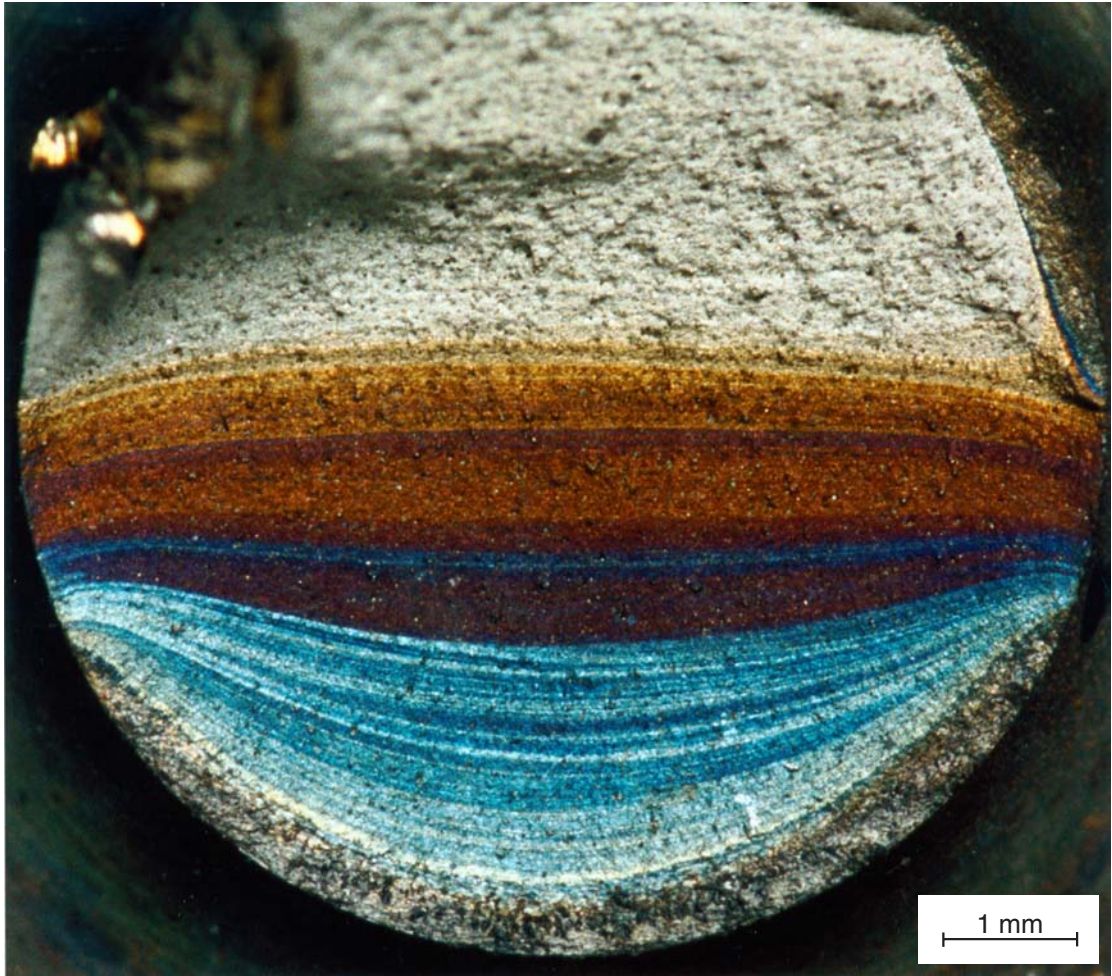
Macro photograph of the fracture surface of the broken rod
